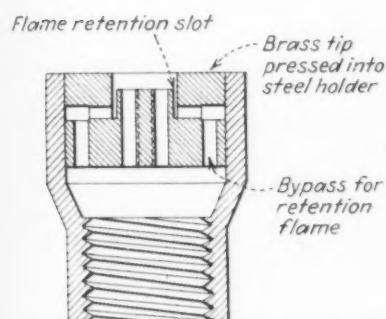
Cross-section of the burner tip in assembly with the burner holder.
